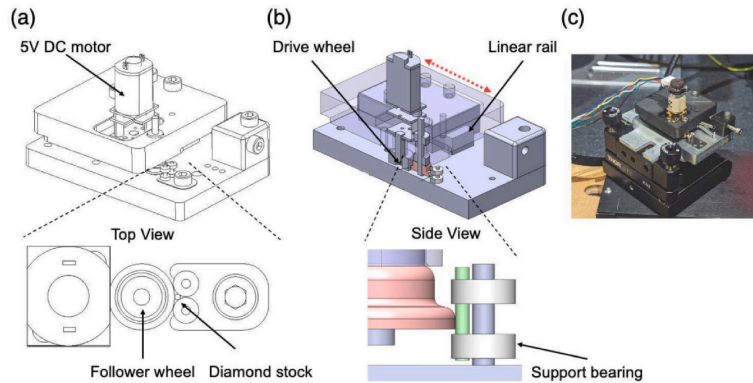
Second-generation centerless inner-diameter stage. (a) Wire-frame and top-view layout showing the drive wheel, follower wheels, and diamond stock. (b) Cross-sectional CAD view showing the drive wheel on a linear rail and support bearings that guide the rotor. (c) Assembled fixture on its positioning stage. The already-machined OD acts as the datum for bore machining, improving ID/OD concentricity. Adapted from Schaffer et al. [2].
